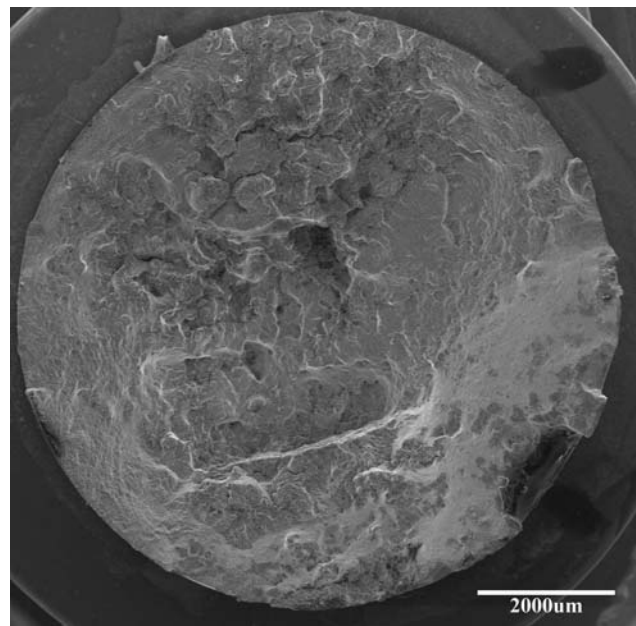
Macroscopic View of a Straight Cylinder Specimen Fracture Surface, $S_a = 392$ MPa (Specimen G7)
